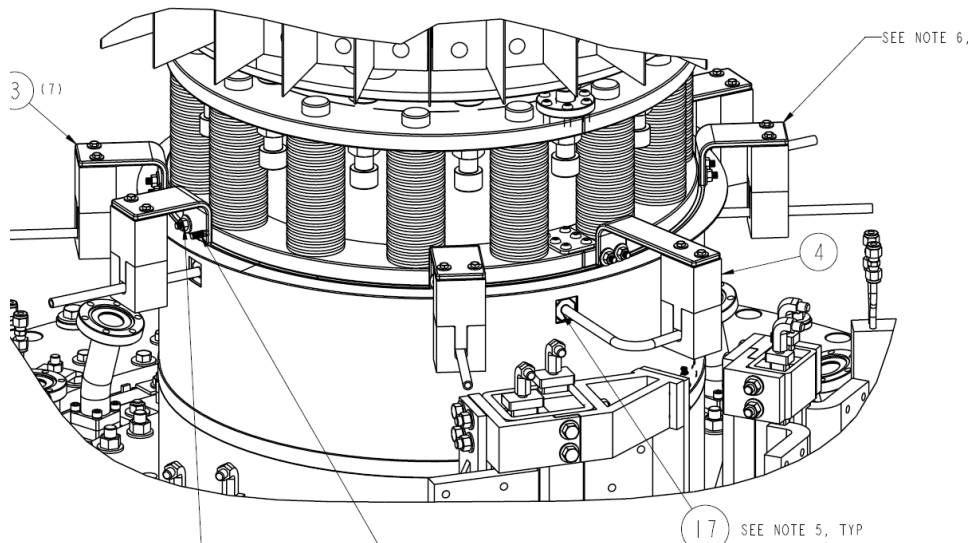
2EDC1944 Cooling Water Tube Support (Upper Details)
